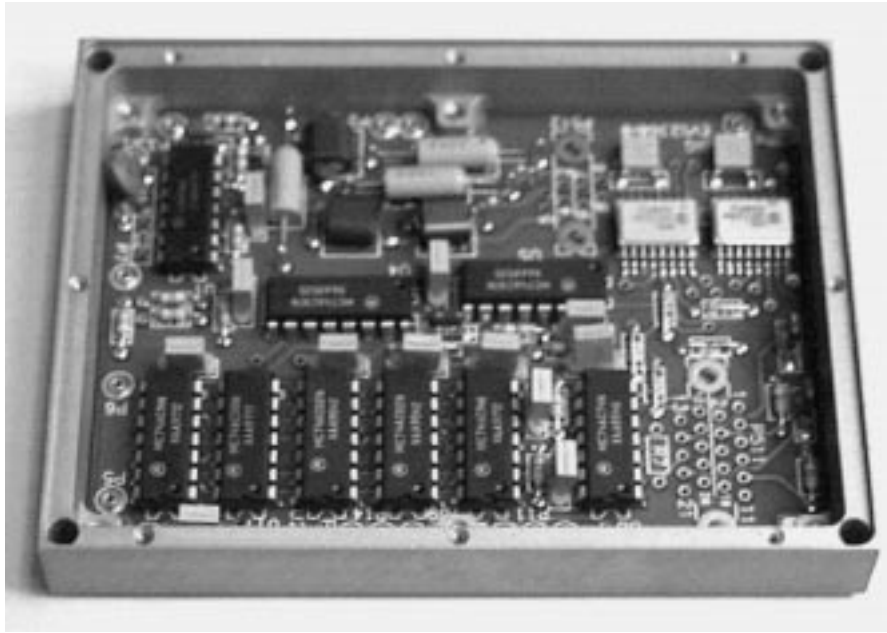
EUV interface electronics board and enclosure. Amplifier and ADC boards have the same footprint and stack below the I/F board.
